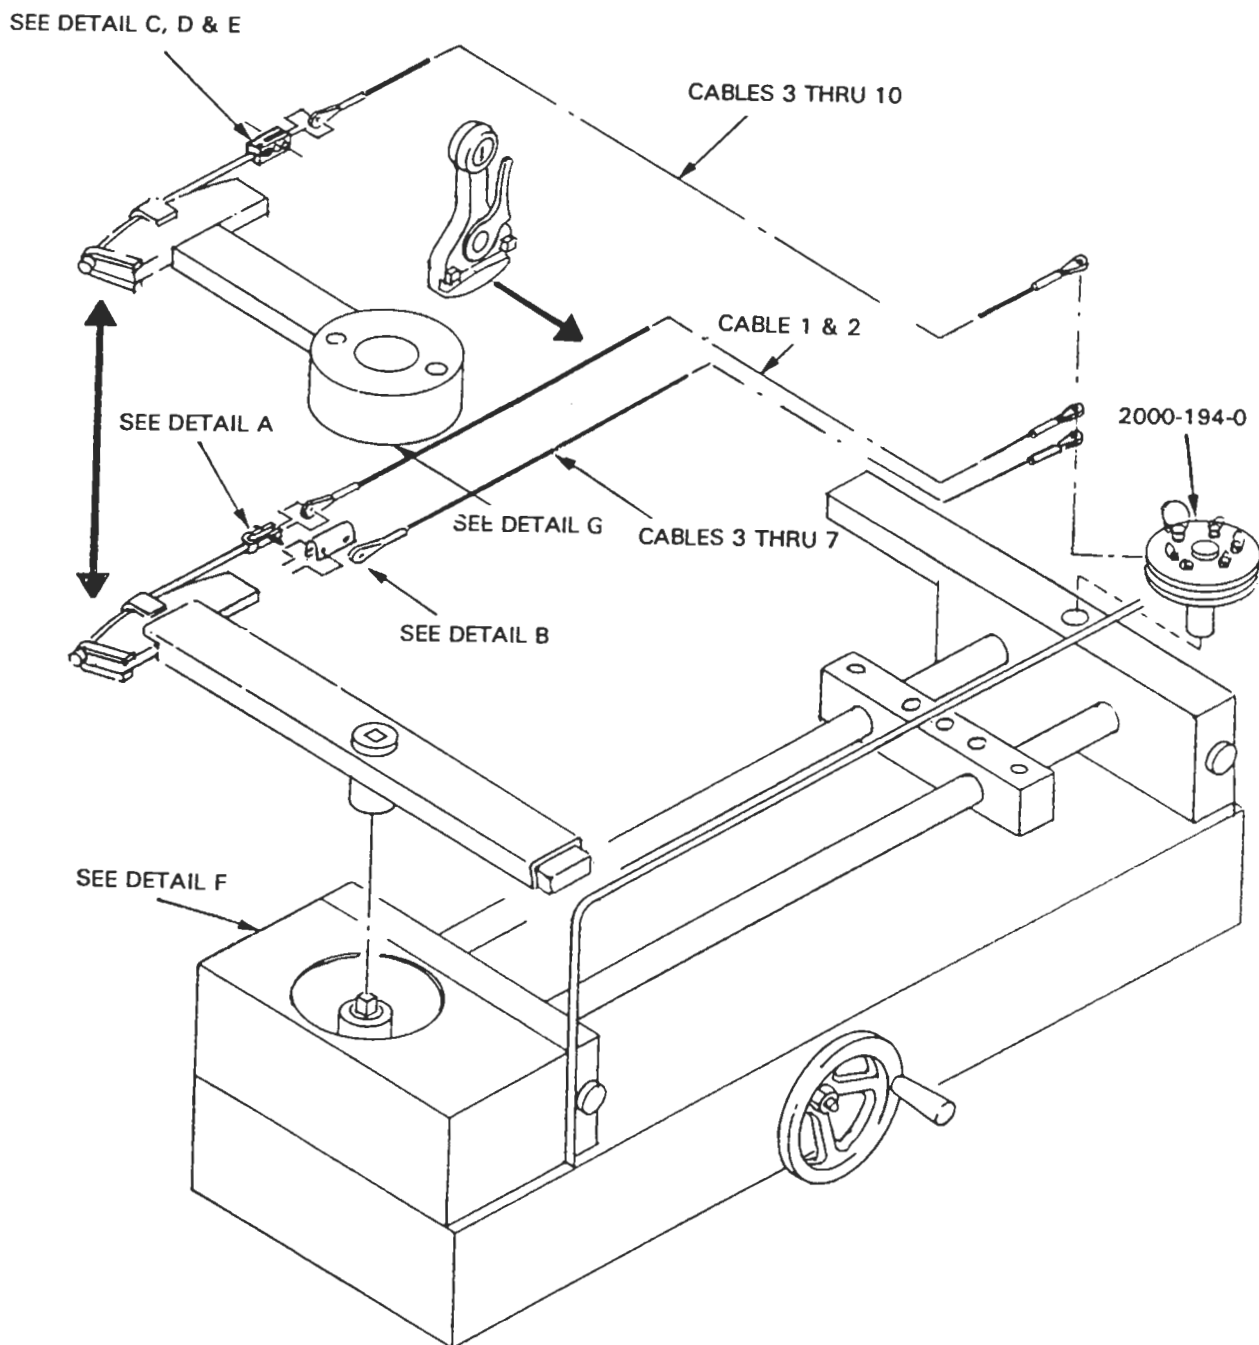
Cable Tensiometer Test Setup (Sheet 1)
